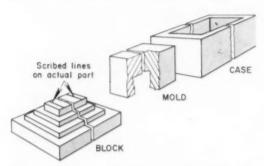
Equipment used to make calibrated blocks for shrink tests of tooling ceramics.
